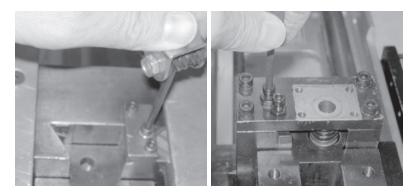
To tighten the slide tension, retract the back adjustment screw (left), then screw in the front adjustment screws.
